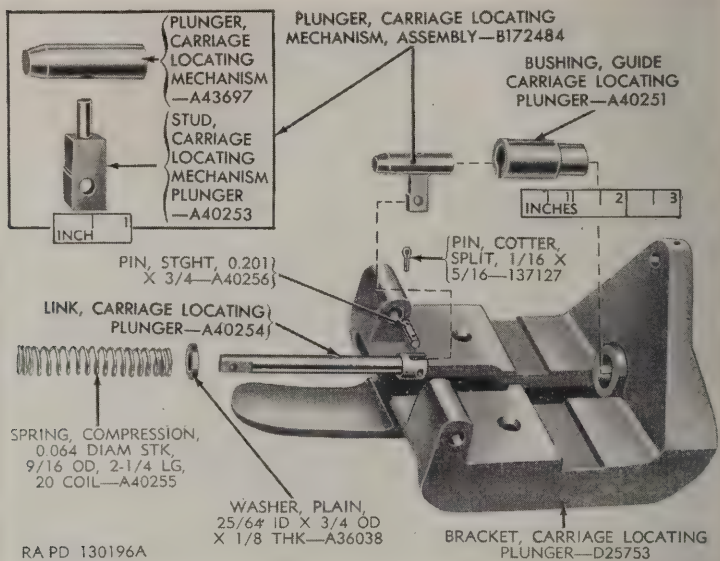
Carriage locating plunger bracket with plunger and link—sound-ranging plotting board M1 or M1A1—exploded view.
